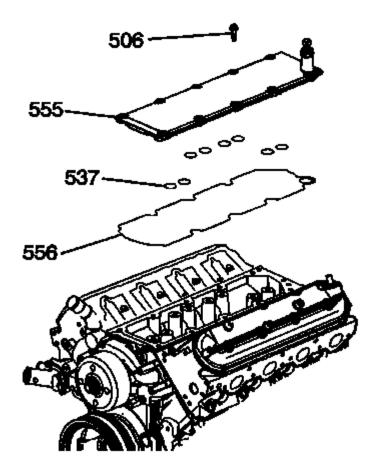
Removing/Installing Engine Valley Cover Courtesy of GENERAL MOTORS CORP.
